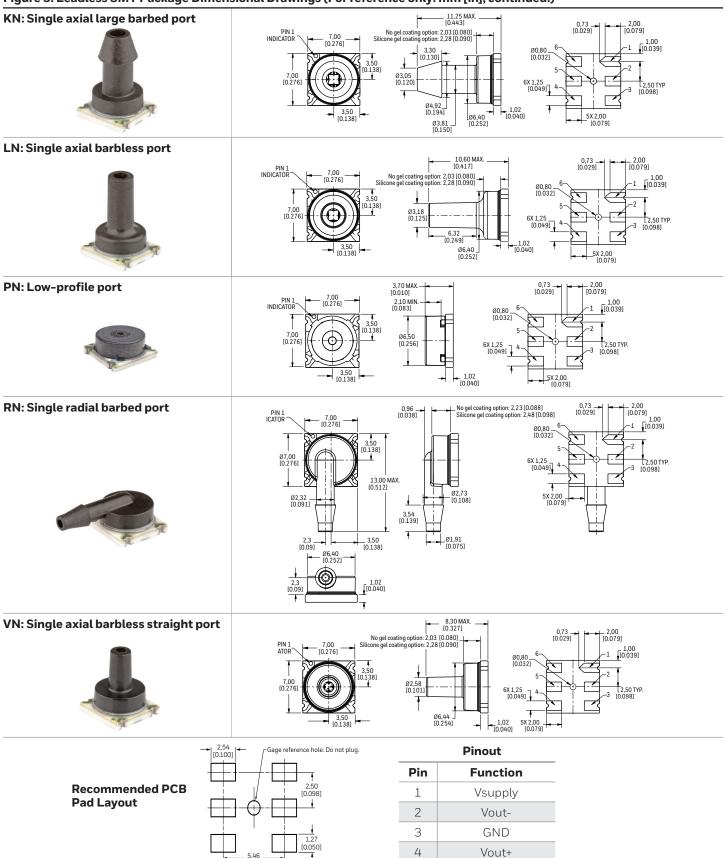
Leadless SMT Package Dimensional Drawings (For reference only: mm [in], continued.)
